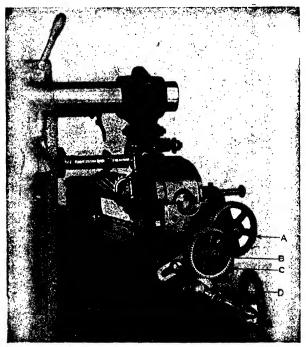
Spiral Milling. A-Gear on worm (driven): B-First gear on stud (driver). C-Second gear on stud (driven). D-Gear on screw (driver).
